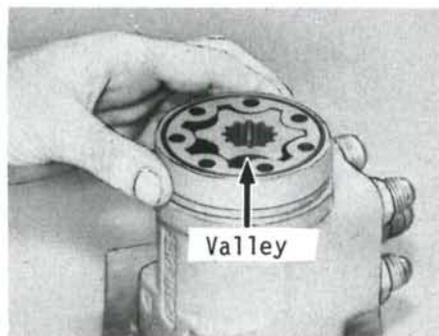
Rotor is properly "timed" to valve spool by engaging drive shaft splines in such a way that one of the valleys in rotor is aligned with drive pin slot in drive shaft.
